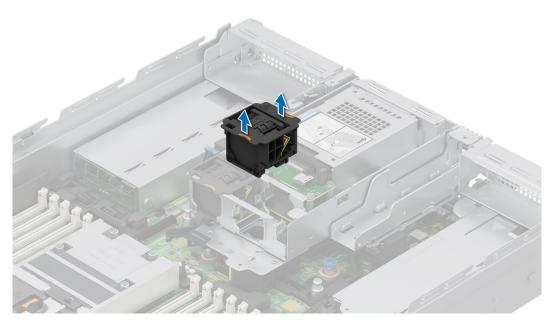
Removing a 2 x 2.5-inch rear drive module cooling fan
